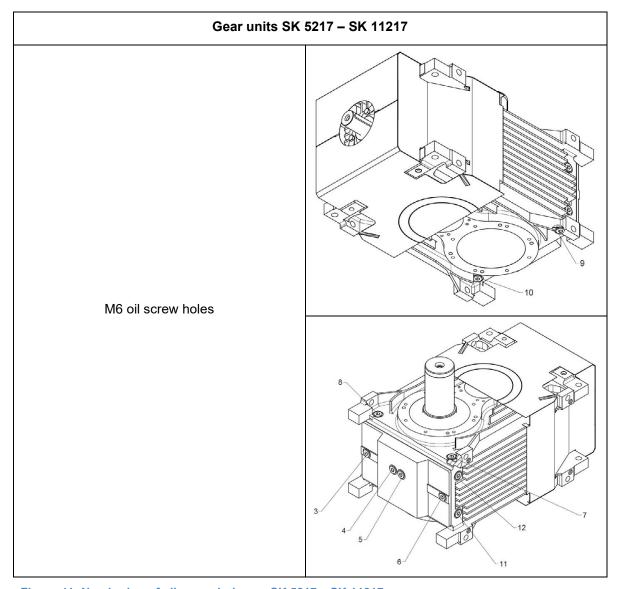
Numbering of oil screw holes on SK 5217 – SK 11217
